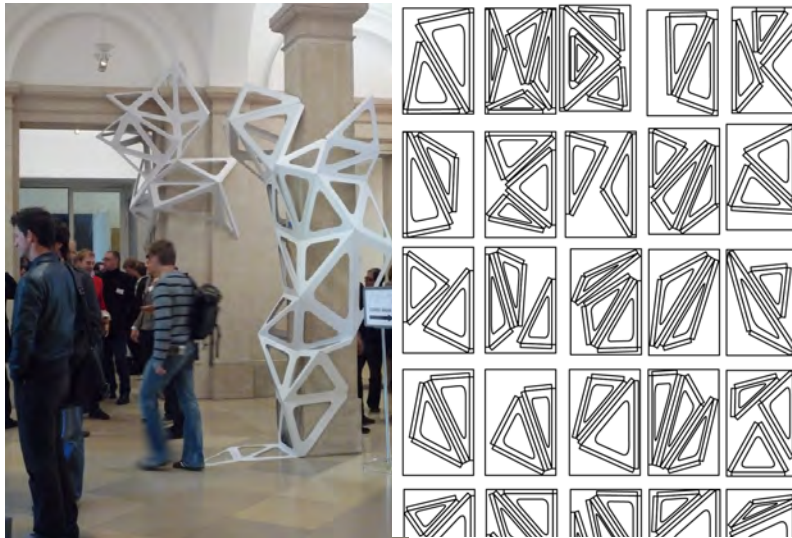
Project view (left). Arranged shapes on cardboard for cutting (right).
